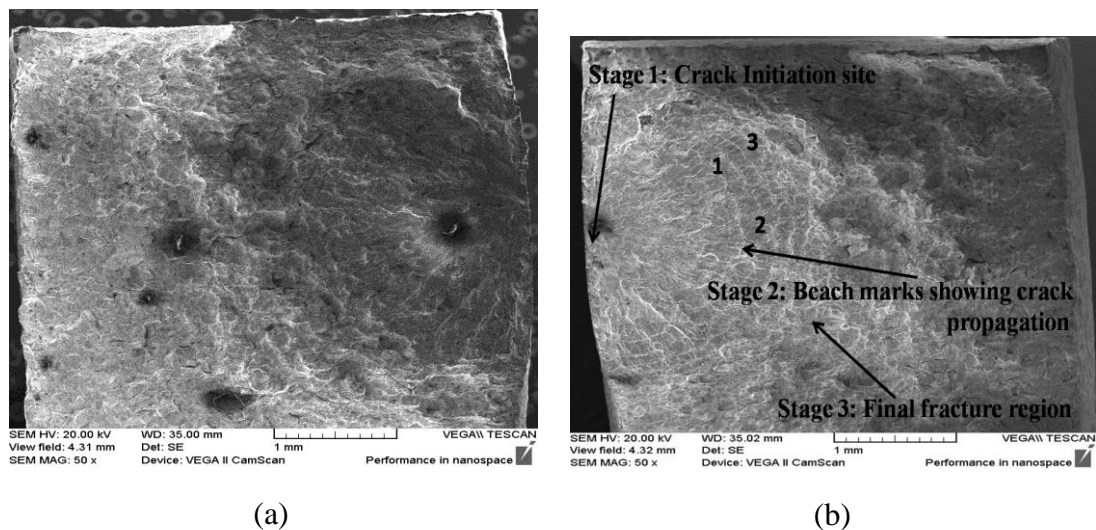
Fracture surfaces for sample HX-HT-NA-1, condition (I)-Heat treatment at 1000 °C-No ablation. (a) General fracture surface appearance. (b) Matching fracture surface with different crack growth stages labeled.
